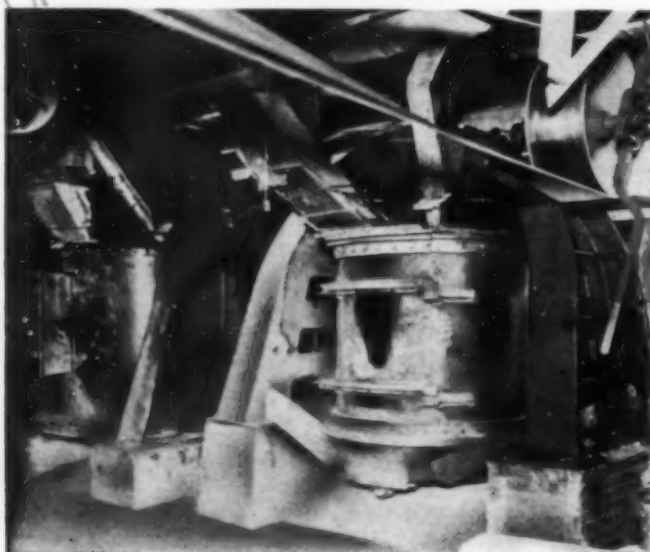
This Pug Mill Compacts the Blend and Extrudes a Continuous Bar of Material Which Is Cut Into Chunks
